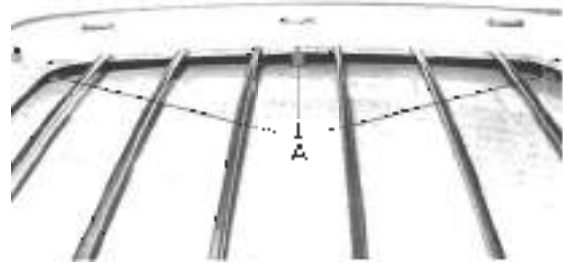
Phillips head screws with rubber spacers A that hold the rear of the luggage rack.
